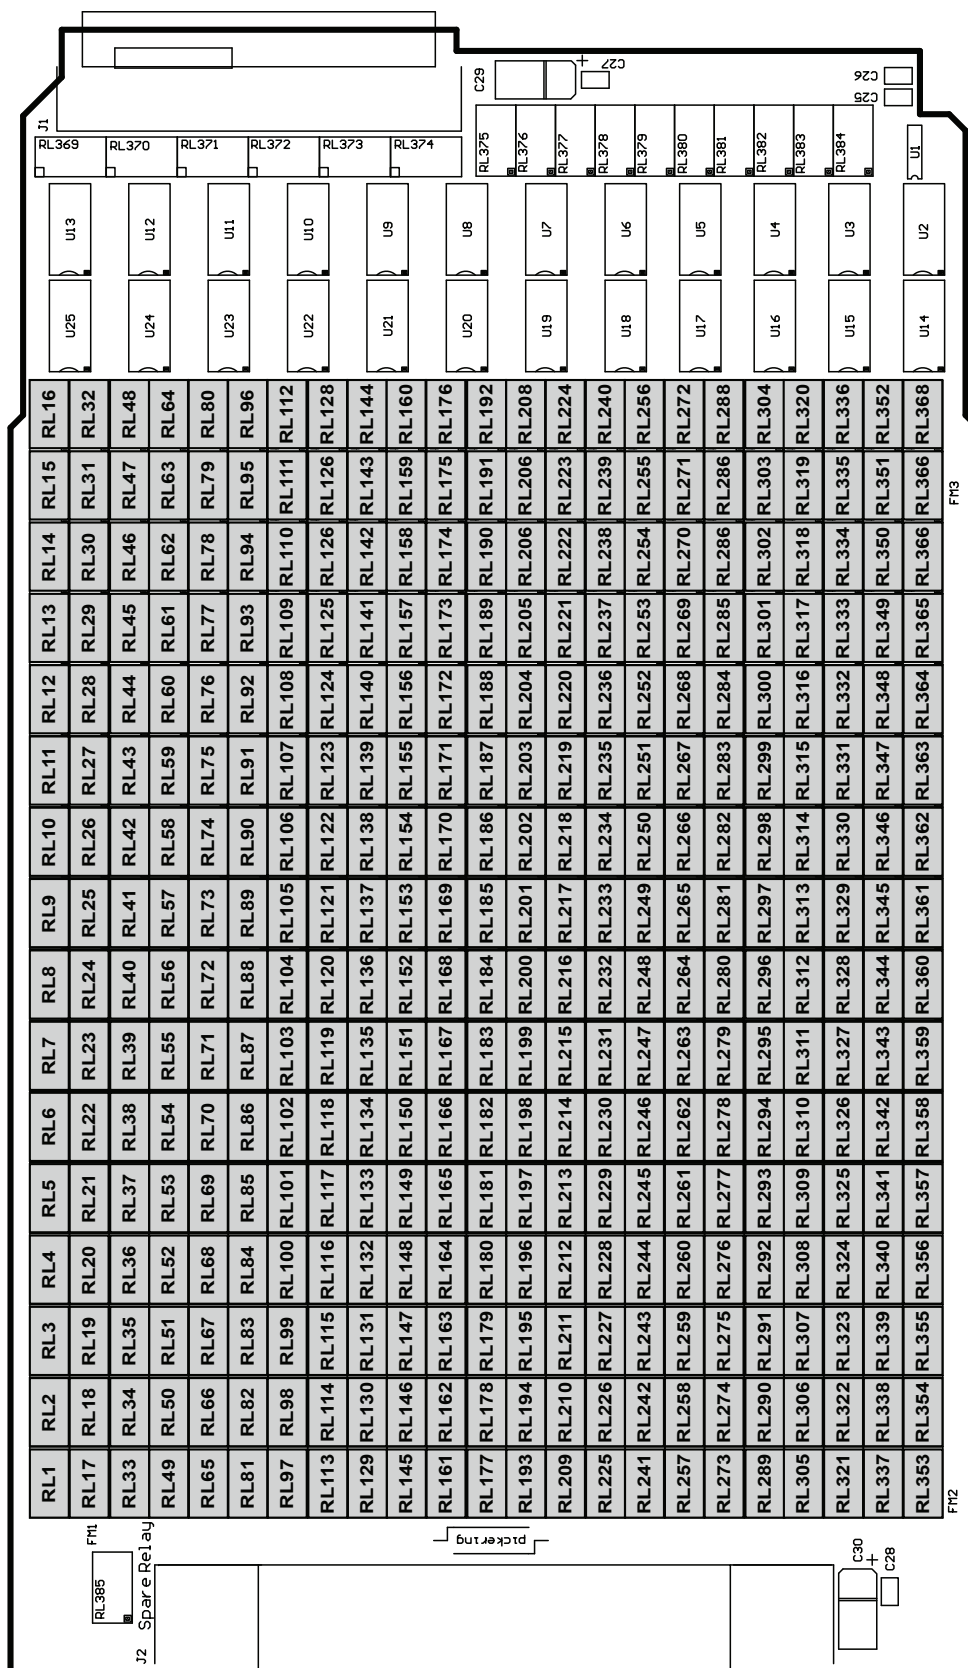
23x16 Matrix Daughter Card: Component Layout
